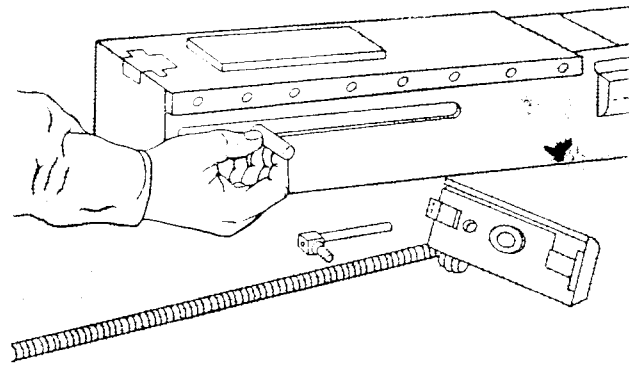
Inserting Bolt Stud of Gun Charger Into Gun Bolt of Machine Gun
